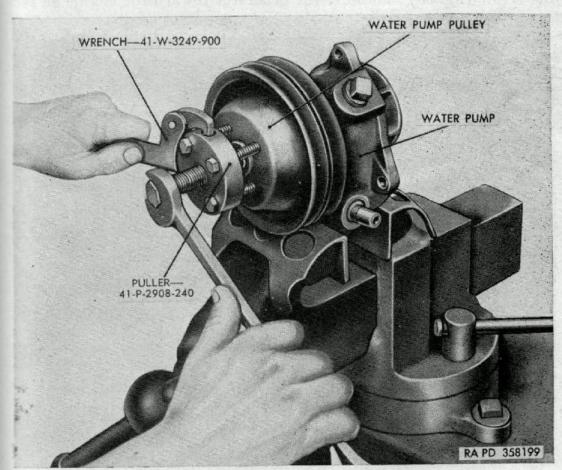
Removing water pump pulley with puller 41-P-2908-240.
